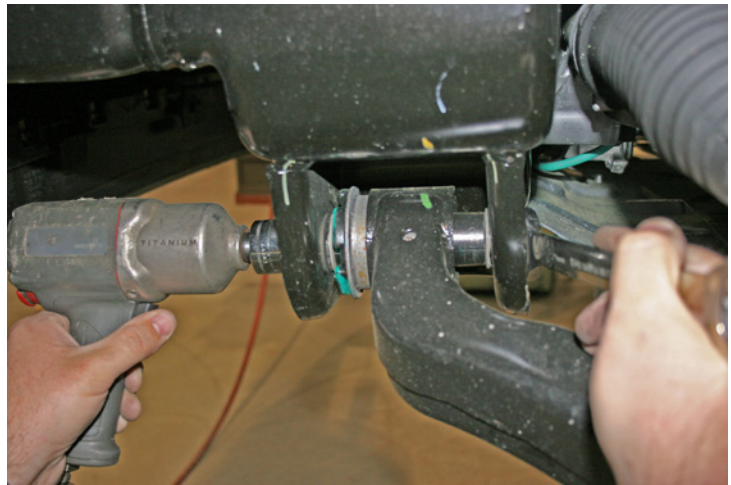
Remove the bolt from the lower strut studs and let the lower control arm swing out of the way. {bolt 27mm, nut 30mm}
